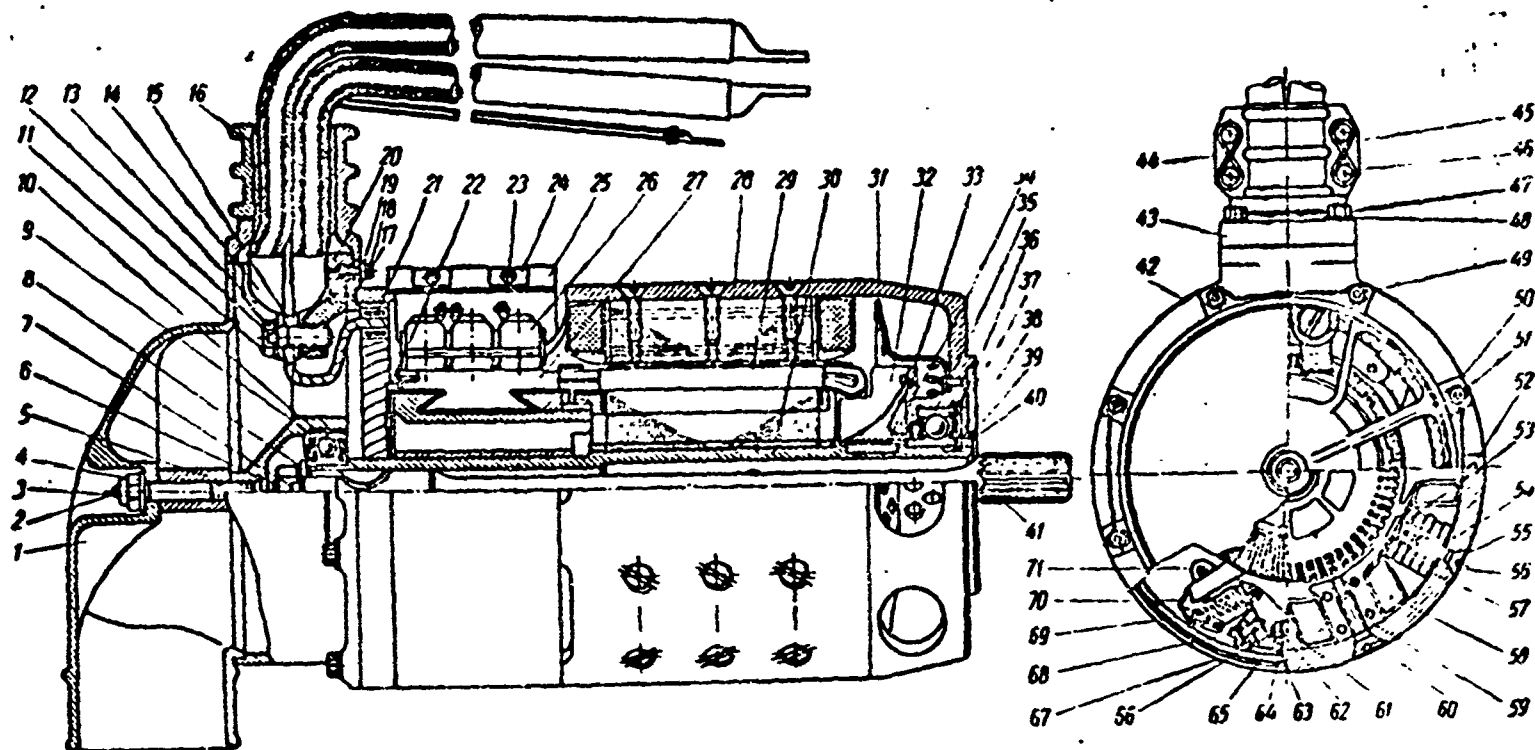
Construction of 9-kw generator with full complement of commutating poles. 1) Cap; 2) bolt; 3) self-locking nut; 4) washer; 5) sleeve; 6) nut; 7) locking tab; 8) washer; 9) ball bearing; 10) key; 11) bolt; 12) locking tab; 13) laminated-fabric gasket; 14) lead; 15) flexible bus; 16) rubber cushion; 17) screw; 18) screw; 19) washer; 20) terminal panel; 21) ring (interbrush connection); 22) equalizers; 23) screw; 24) shaft; 25) protective strip; 26) brushes; 27) commutator; 28) frame; 29) armature; 30) hollow shaft; 31) guard; 32) fan; 33) key; 34) washer; 35) ball bearing; 36) trap; 37) snap ring; 38) spacer; 39) locking tab; 40) nut; 41) flexible shaft; 42) guard; 43) nipple; 44) clamp; 45) washer; 46) screw; 47) bolt; 48) washer; 49) bolt; 50) washer; 51) bolt; 52) pin; 53) commutating pole; 54) brass gasket; 55) screw; 56) commutating-pole winding; 57) laminated-fabric gasket; 58) field winding; 59) main pole; 60) screw; 61) nut; 62) washer; 63) screw; 64) laminated-fabric sleeve; 65) mica washer; 66) micanite cover; 67) micanite insert; 68) screw; 69) spring; 70) lever; 71) brushholder.
